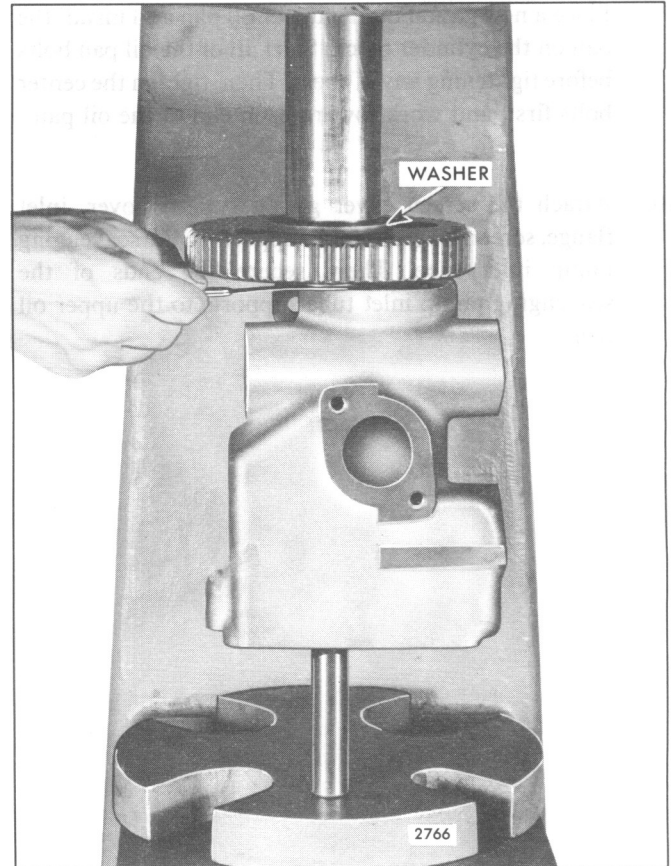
Installing Oil Pump Drive-Driven Gear on Shaft
